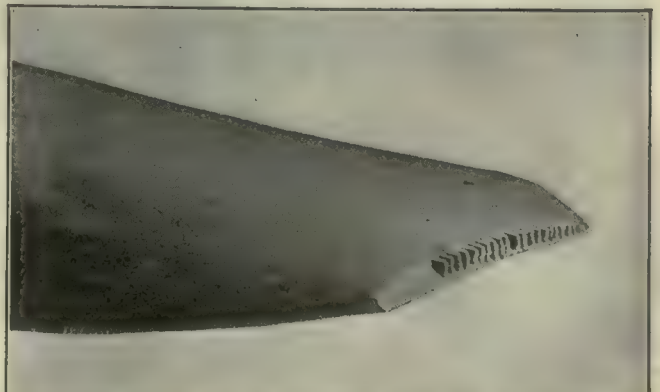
PROPELLER BLADE PARTLY BEVELED FOR WELDING
